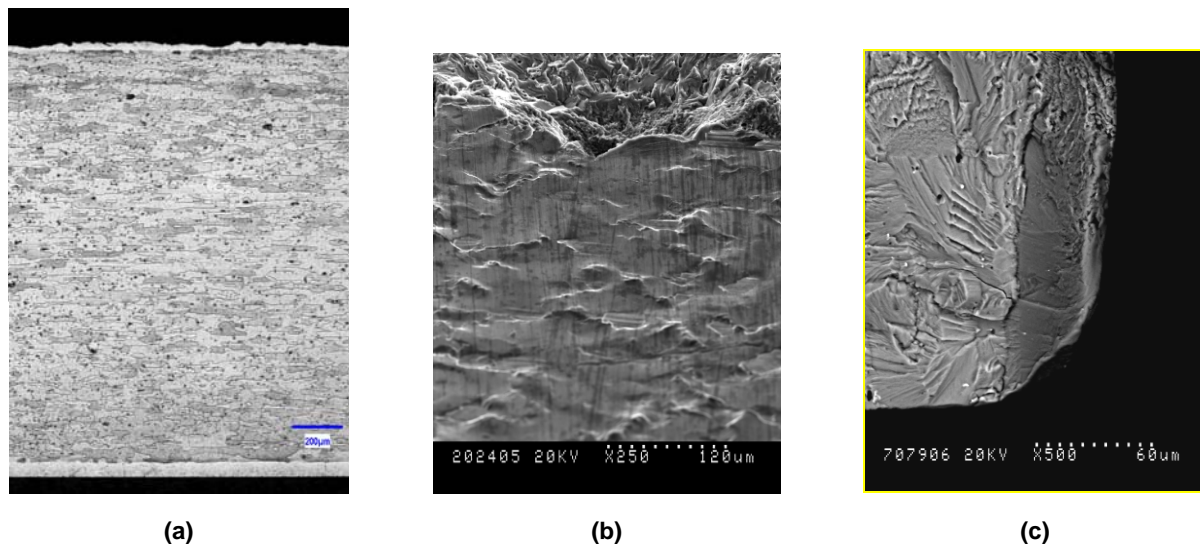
The Thin Clad Layer Corrodes Rather Mildly and Uniformly to Protect the Core Alloy – (a) General corrosion of clad layer at the exterior surface of fuselage skin (top surface) from B727; (b) Tilted image crack nucleation site as indication of severe deformation and cracking at clad layer at the surface of 2024 core alloy which failed in fatigue testing; and (c) Fracture surface showing the clad layer (~ 50 μm) at the right side [15].
